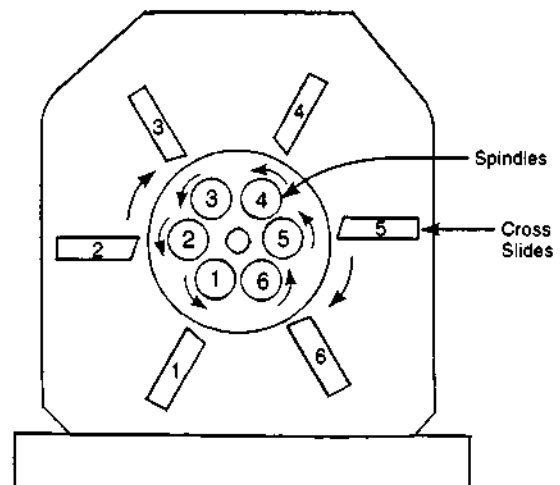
A2c3 The headstock of a typical six-spindle, multiple-spindle screw machine. All six spindles carry bar stock and rotate continuously. Periodically, each spindle is indexed to a new position. Cutting operations at all indexed positions take place simultaneously. There are also as many as six cutting tools located on the tailstock of the machine.
